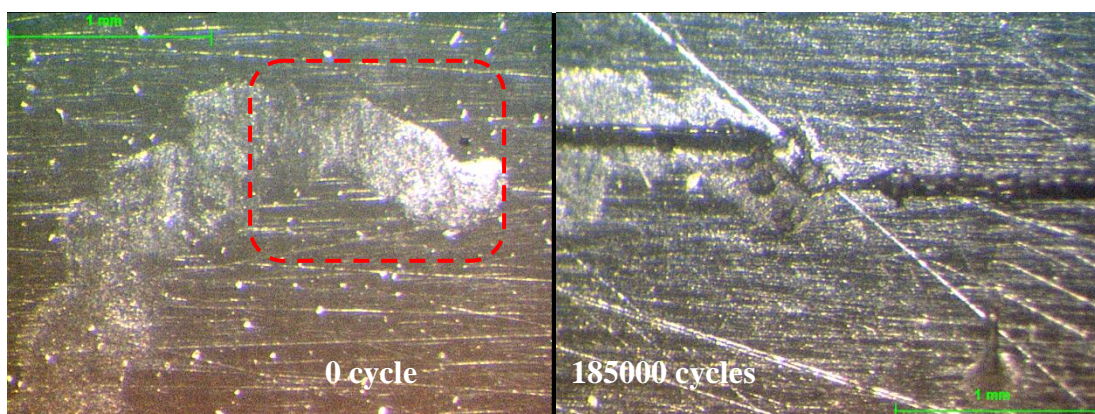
Larger scale fatigue specimen 1 – Fatigue crack initiating from a corrosion flaw at 185000 cycles.
